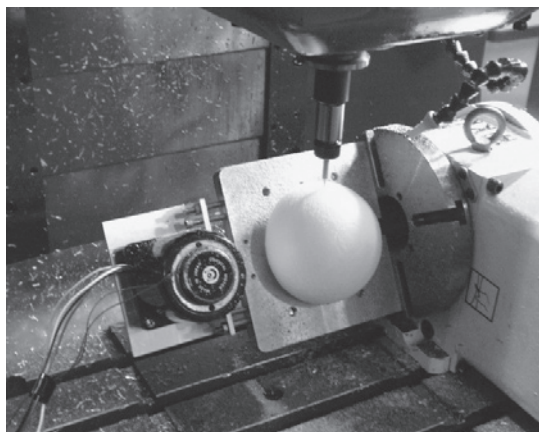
Dual axis rotation mechanism to produce the hemispherical coil bobbin
